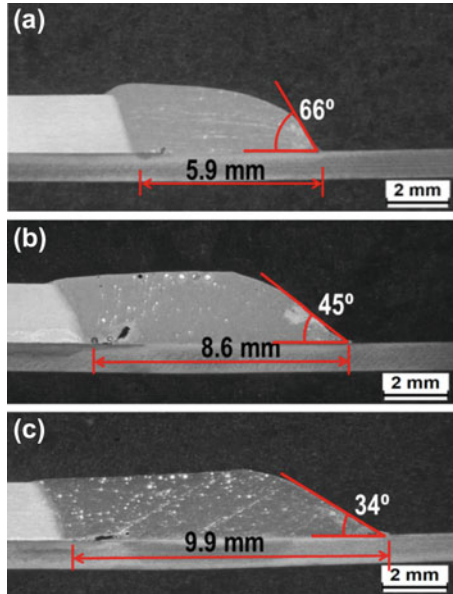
Cross section of weld-brazed joints a 4 m/min; b 5 m/min and c 6 m/min
